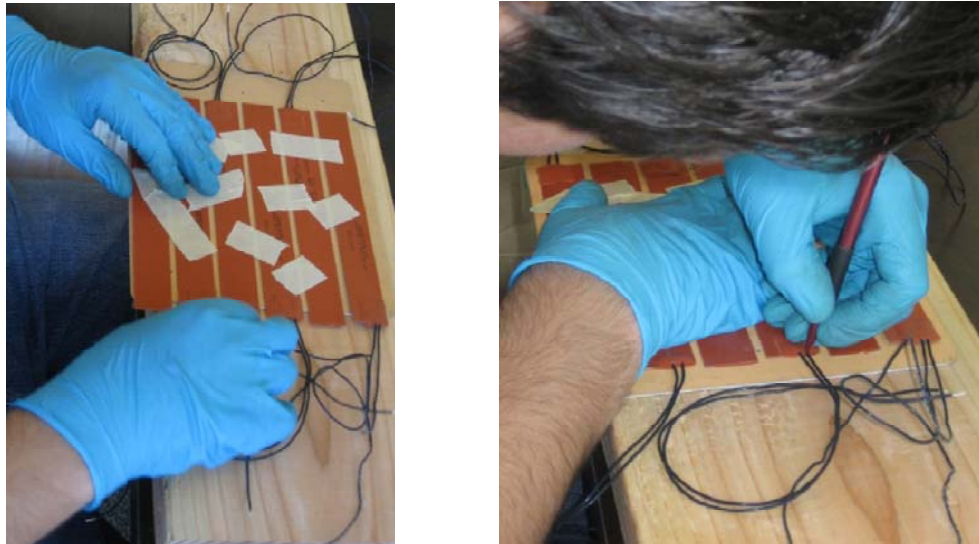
Left: Initial alignment of heaters onto FR4 board. Right: Marking positions once mounted
